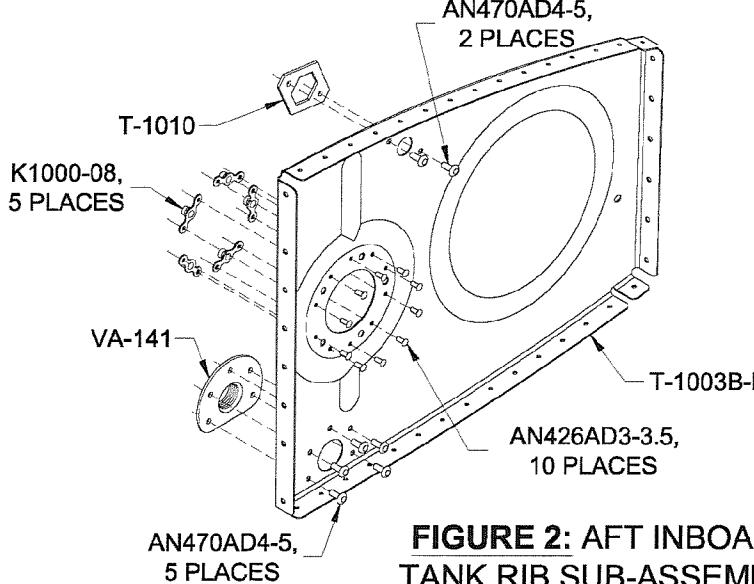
AFT INBOARD TANK RIB SUB-ASSEMBLY
